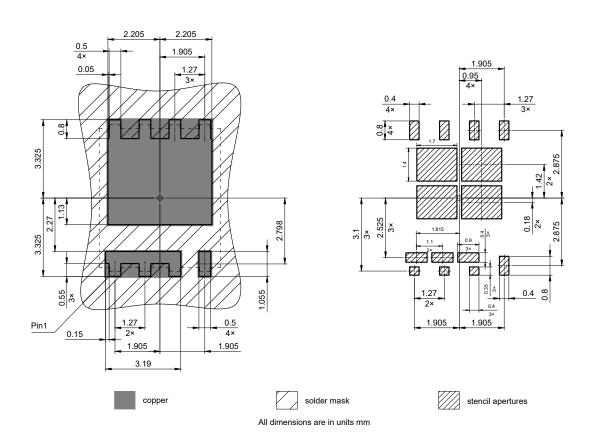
Outline Boardpads (PG-TDSON-8-FL), dimensions in mm
